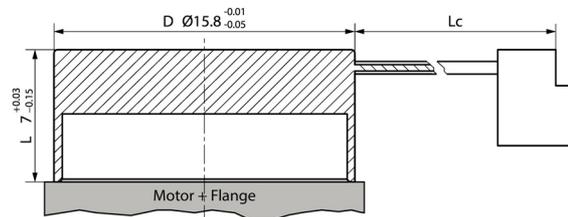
ENX 16 RIO – Dimensional Drawing [mm]
